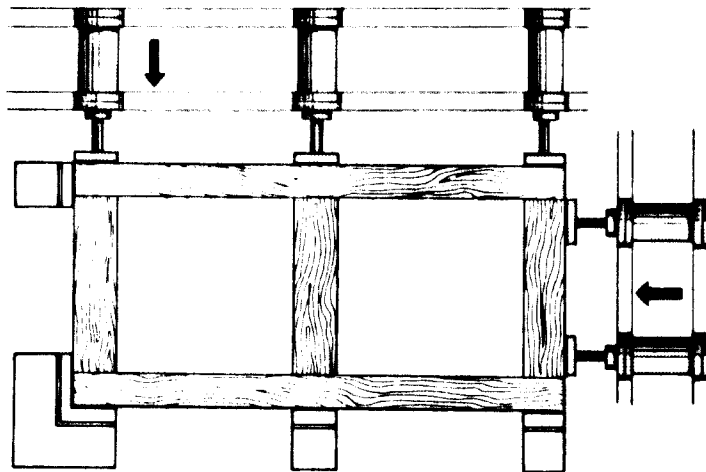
Frame clamp which may be arranged standing, inclined or horizontal. The clamping cylinders are adjustable.
